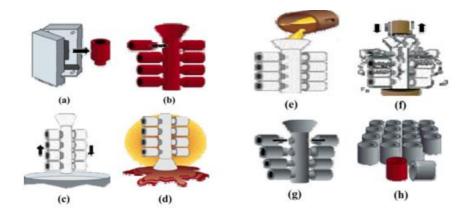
Basic steps involved in ceramic shell investment casting: (a) pattern production, (b) pattern assembly, (c) investment, (d) dewaxing, (e) casting, (f) knock-out, (g) cutoff, and (h) finishing and inspection (Kalpakjian and Schmid, 2008)
